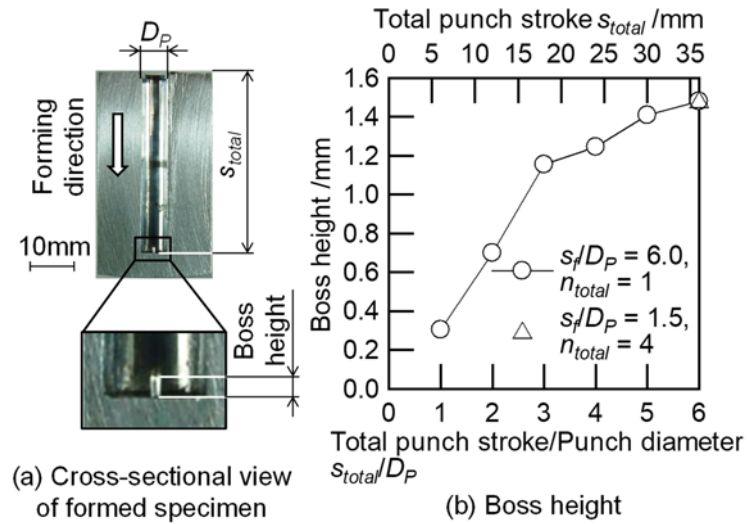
Height of the boss at the bottom of the hole in the aluminium specimen (extrusion ratio  $R = 1.07$ ).
